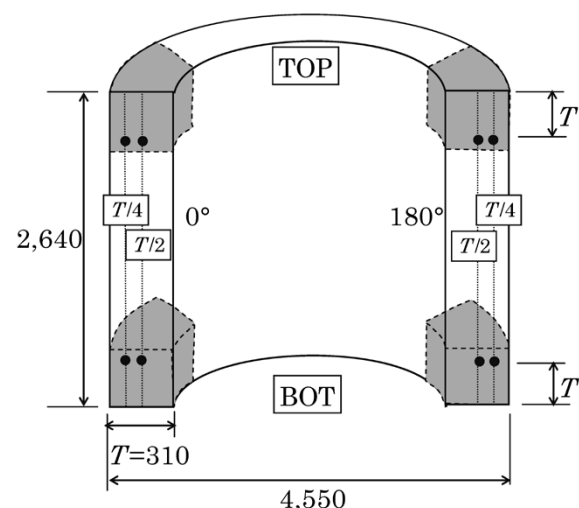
Shape and dimensions of trial shell ring and sampling position of test specimen
